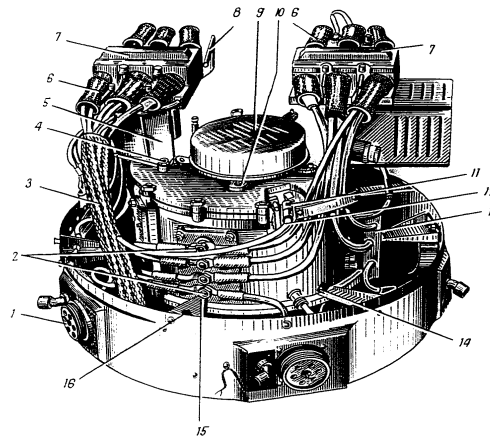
MAIN ROTOR SLIP RING WITH TOP FAIRING REMOVED
